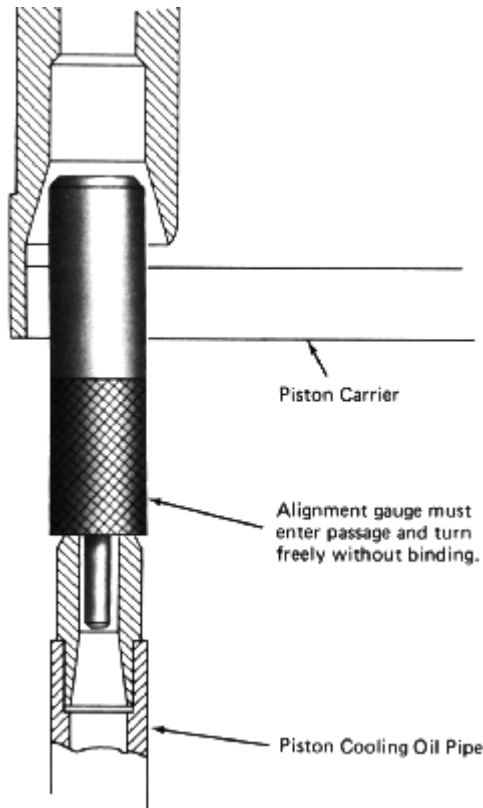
Piston Cooling Oil Pipe Alignment
